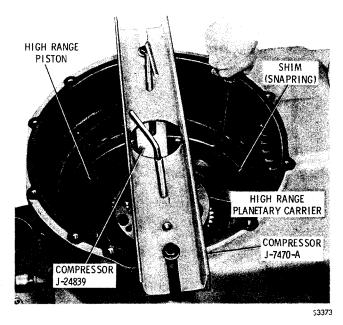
Removing forward-and-highrange clutch piston housing snapring
